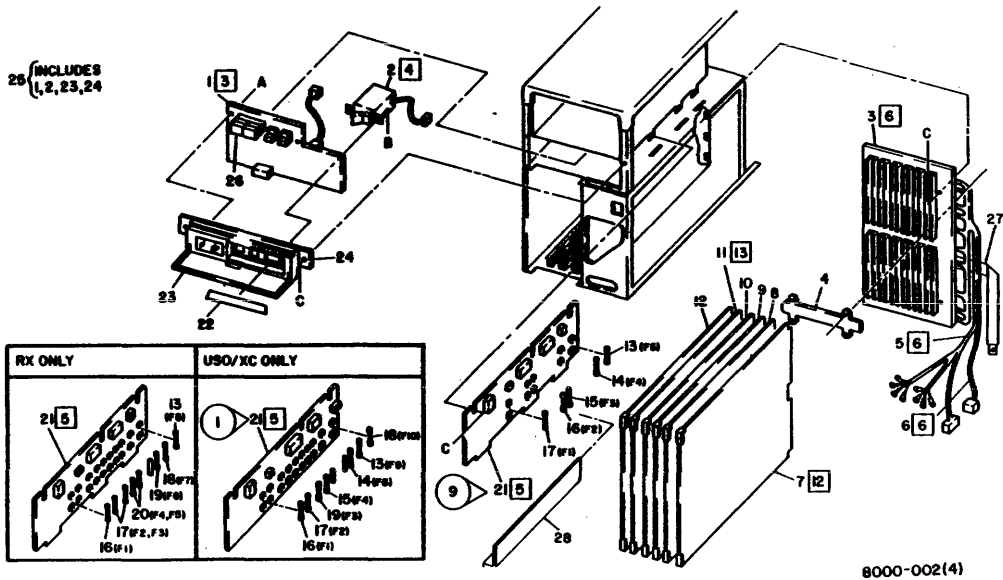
Processor Printed Wiring Assemblies (Page 4)
